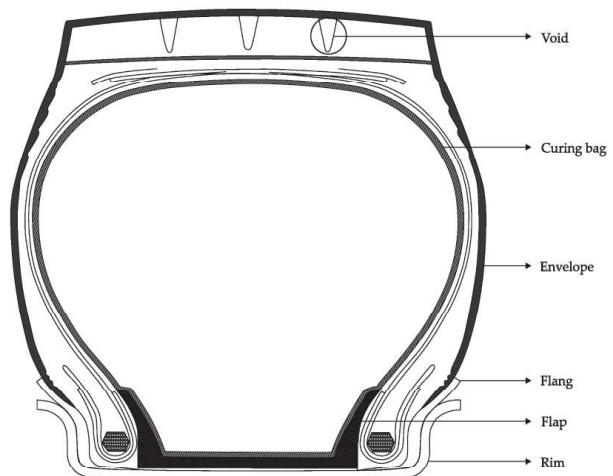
Cross sectional view of a radial casing assembled with tread on rim fitted with other accessories
